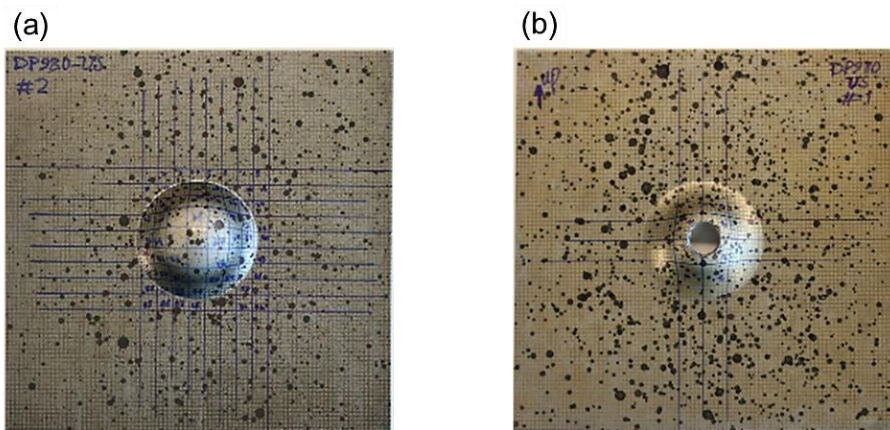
(a) Bulged specimen and (b) hole-flanged specimen of DP980.
